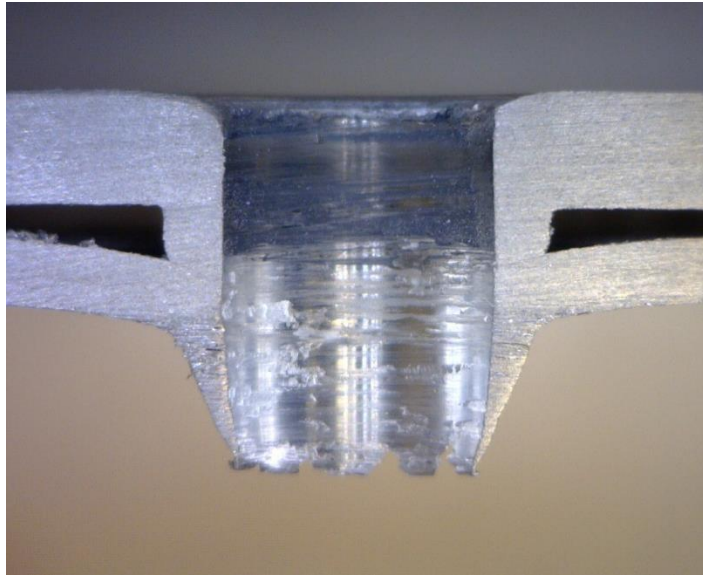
The coalescence of 2.29 mm & 1.25 mm sheet metals in free space friction drilling at 4000 rpm and 3.81 cm/min using 5.3 mm drill bit.
